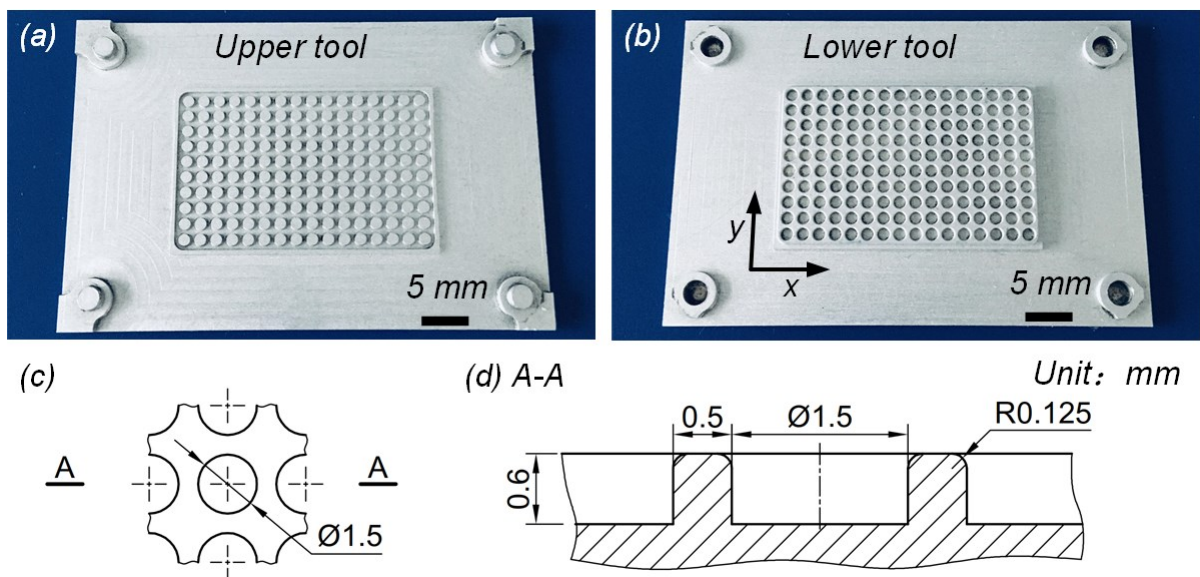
Upper tool (a) and lower tool (b) with circular micro structures. The top view (c) and cross-sectional view (d) of circular micro structures on the lower tool.
